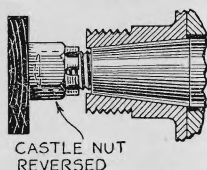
An emergency method of removing Ford rear wheel is to tap reversed castellated nut
